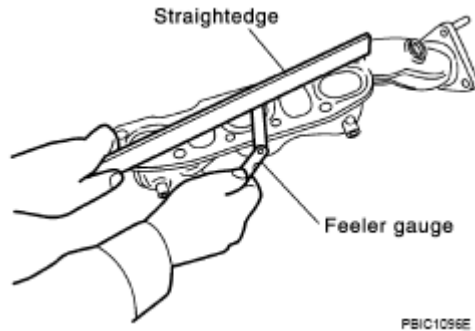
Checking Surface Distortion Of Exhaust Manifold Mating Surface
